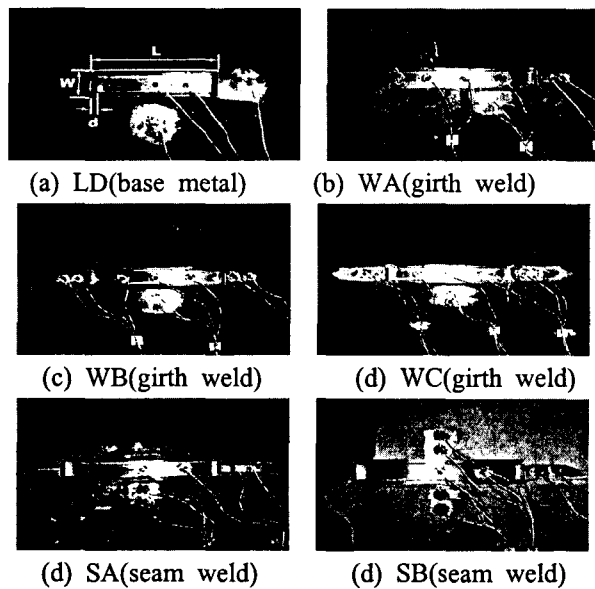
The shape and region of artificial corrosion defect within the body, the girth weld and the seam weld of pipe.
